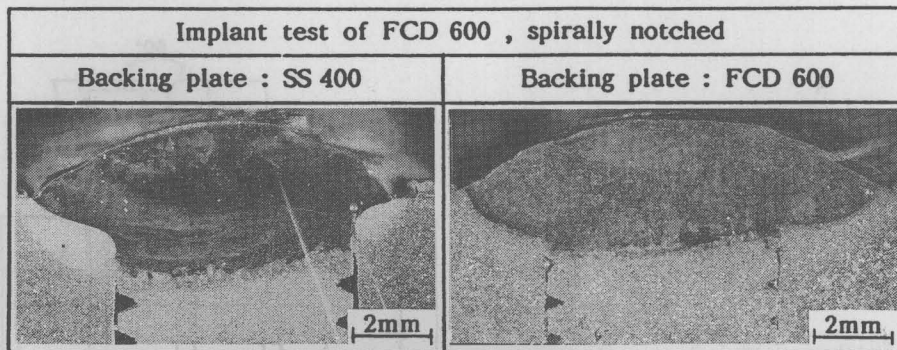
Macro photographs of welds : backing plate SS400 (left) , FCD600 (right) , heat input : 2.1MJ/m
